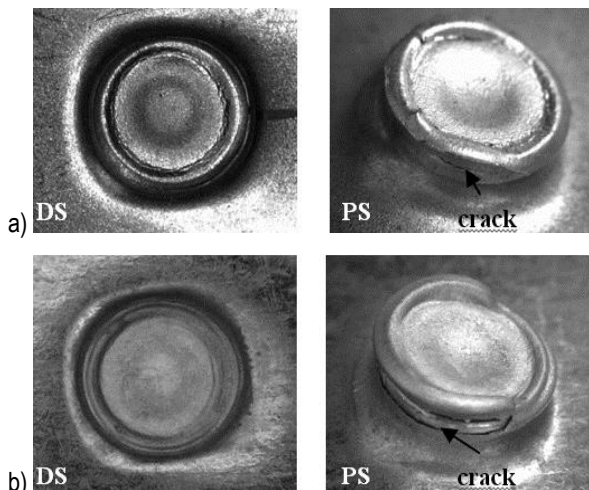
ClinchRivet joints after tensile test: a) H220PD, b) DX51D+Z (DS – die side, PS – punch side)
